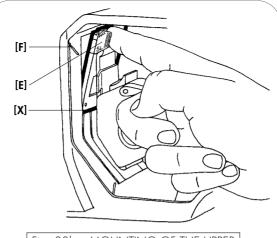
MOUNTING OF THE UPPER APERTURE PLATE
